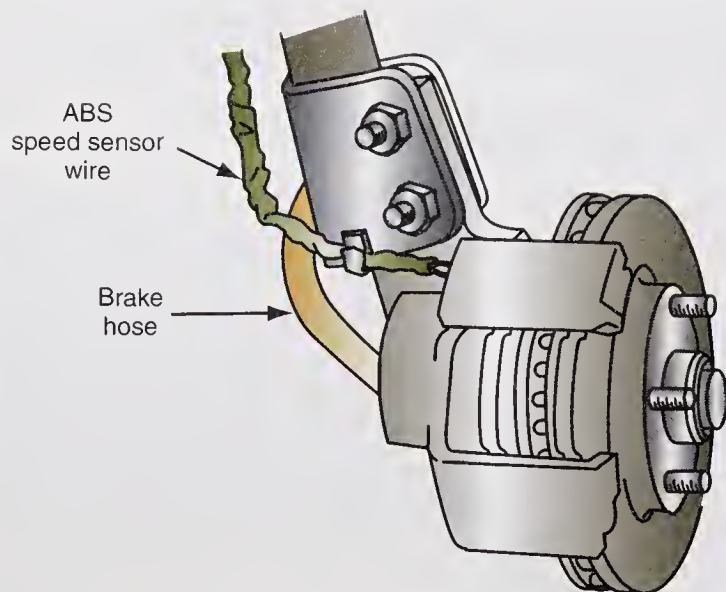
Disconnecting brake hose and ABS wire from the rear strut.
